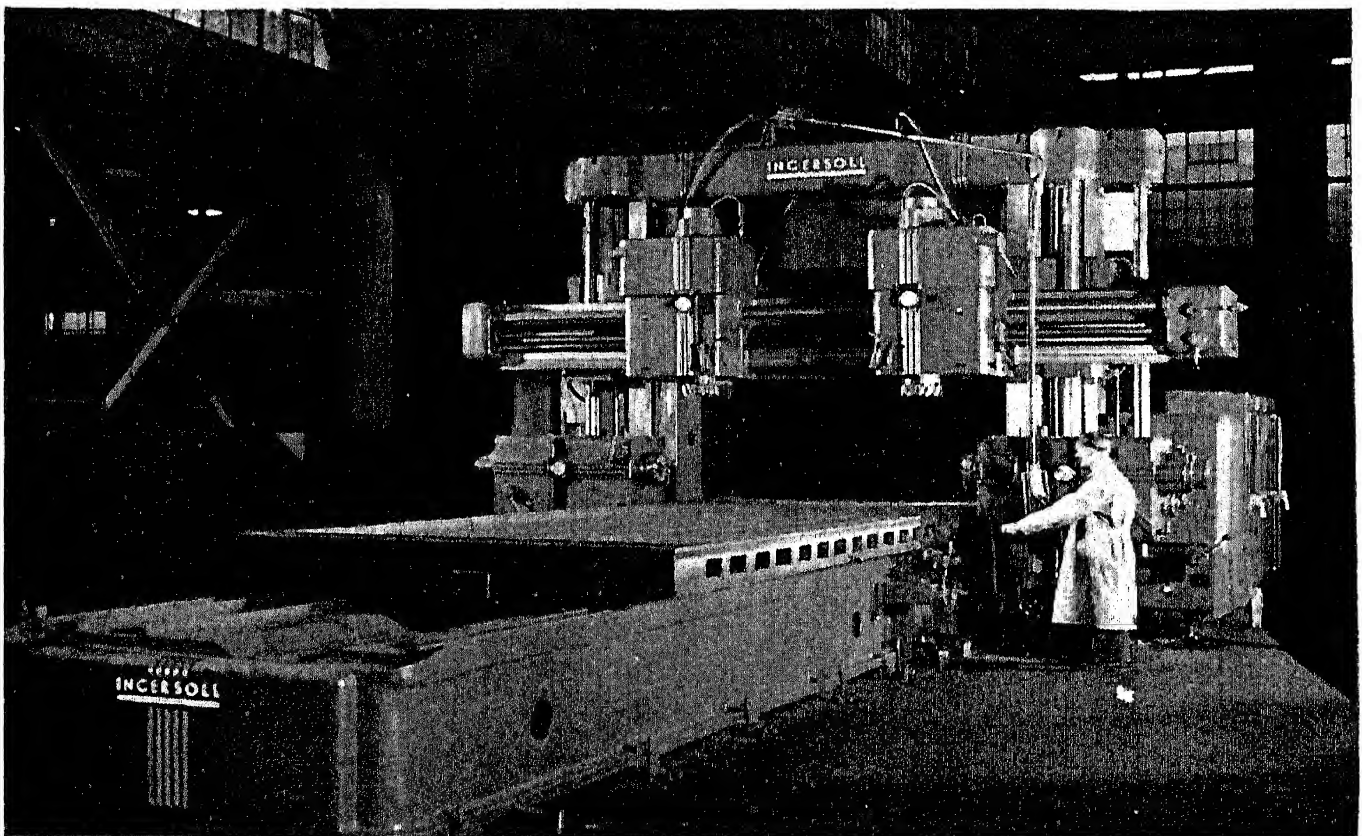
A 96 in. by 60 in. by 20 ft planer type adjustable rail milling machine. (Courtesy The Ingersoll Milling Machine Co.)
